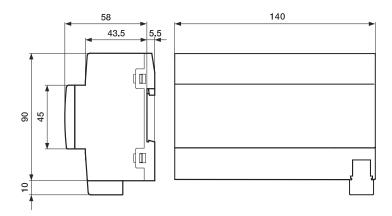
Dimensions of 8gang switch actuator MDRC (specifications in mm)
